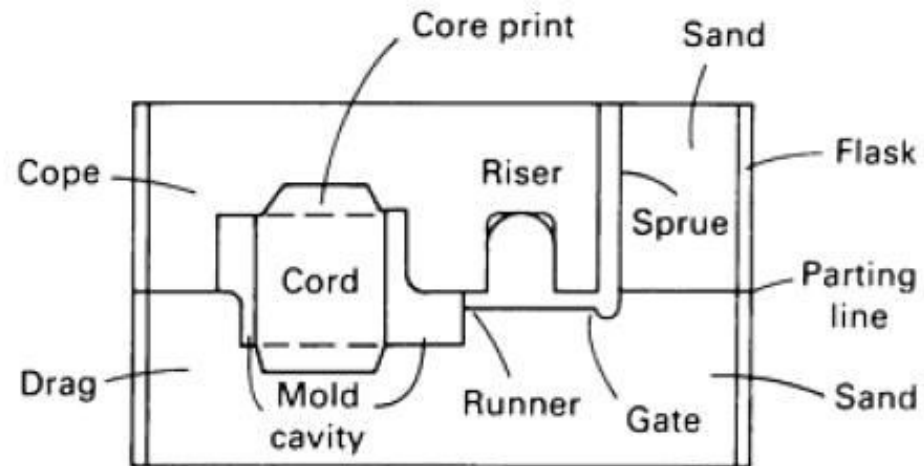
Schematic of a sand mold. The pattern is used to form the mold cavity, the core print for locating the core, the gate, the runner, the riser, and the sprue. A separate core box is used to make the sand core that is inserted into the parted mold before pouring.
